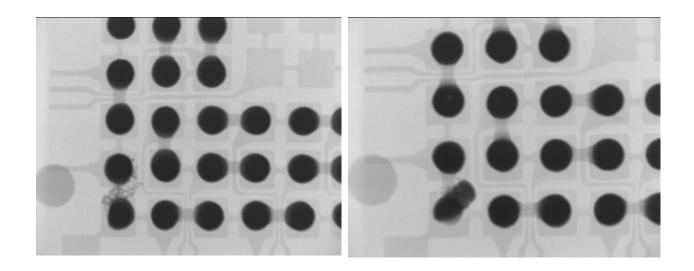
X-ray Pictures of Underfill Contacting the Solder Paste
